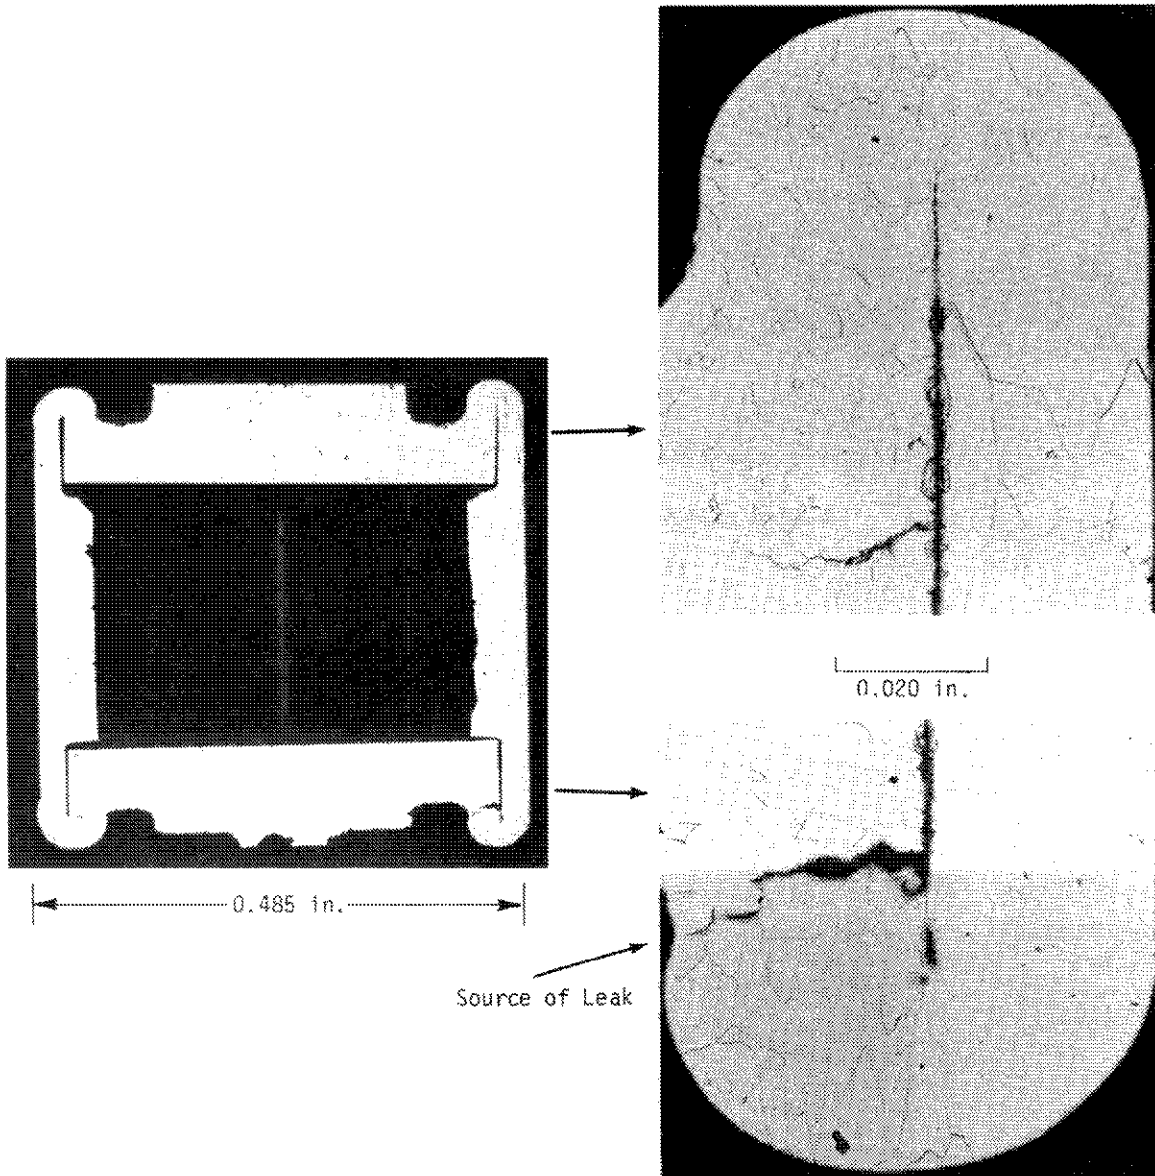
WELDED IRIDIUM CAPSULE
